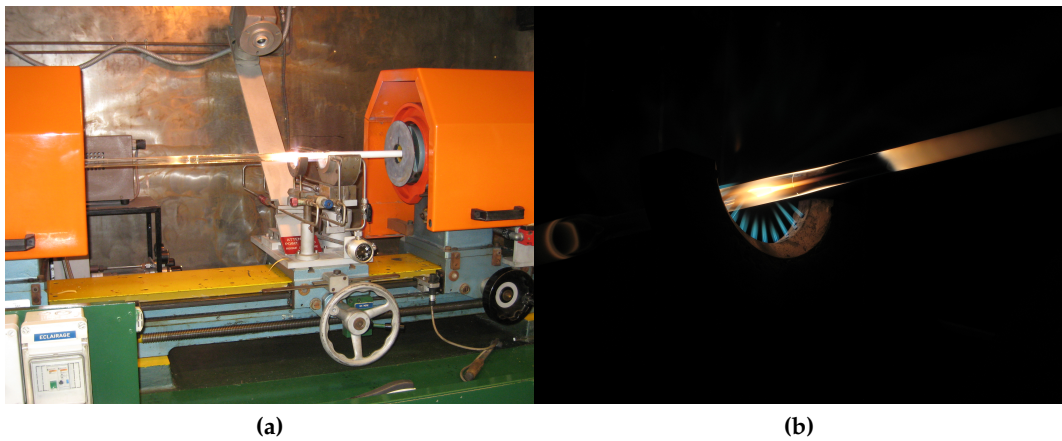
(a) MCVD machine used at INPHYNI. (b) Detail of preform silica tube during the manufacturing process.
